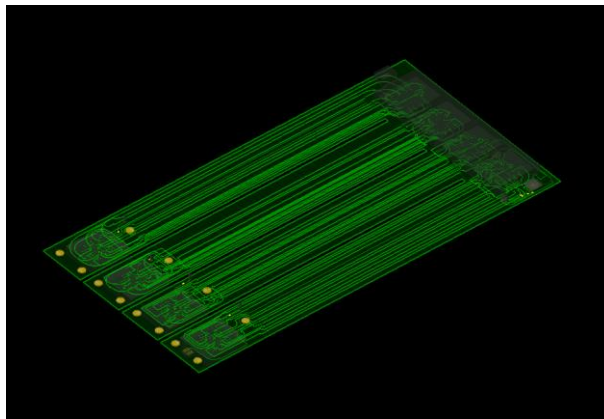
The Flex-Rigid board PCB design for the Copper connection option.
